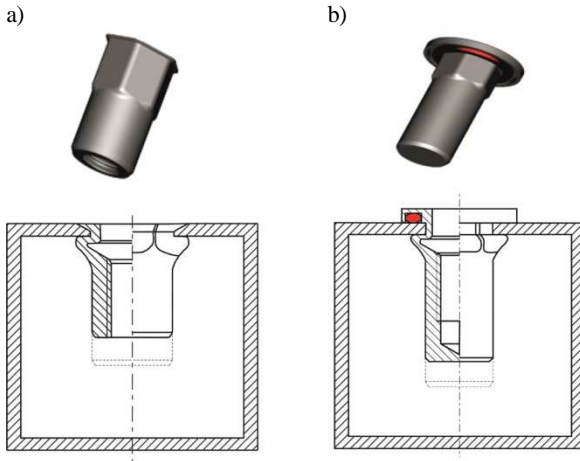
The example of the threaded sleeves using in the closed profile: a) simple solution, b) solution with the sealing element
